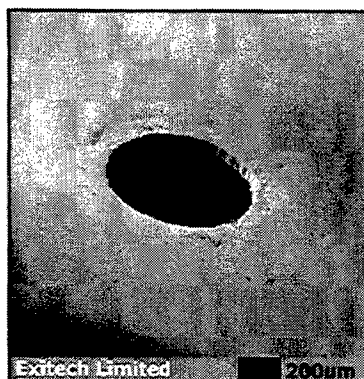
A thin sheet of stainless steel machined with a short pulse laser.
